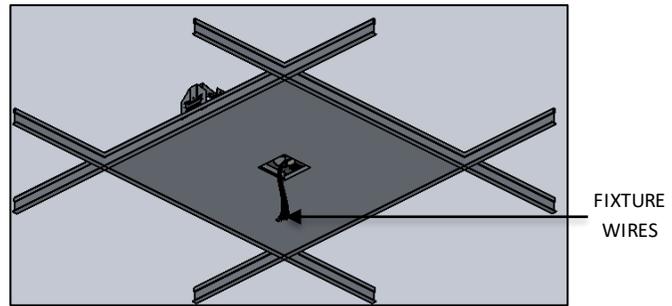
ASSEMBLED VIEW SHOWING RECESSED J-BOX TO THE CEILING
